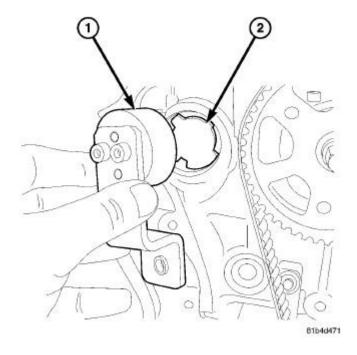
Camshaft Lock Tool Courtesy of CHRYSLER LLC
